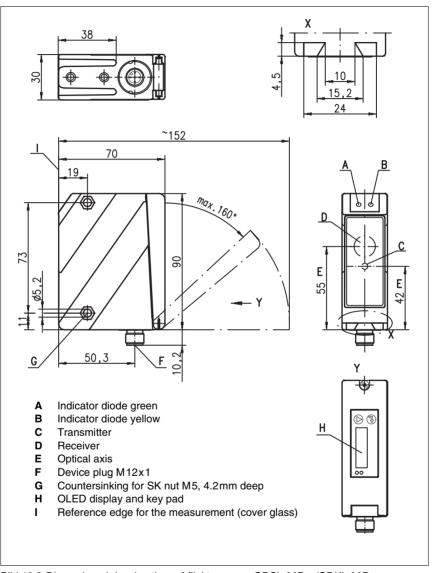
Dimensioned drawing ODS 96B..., ODSR 96B...
